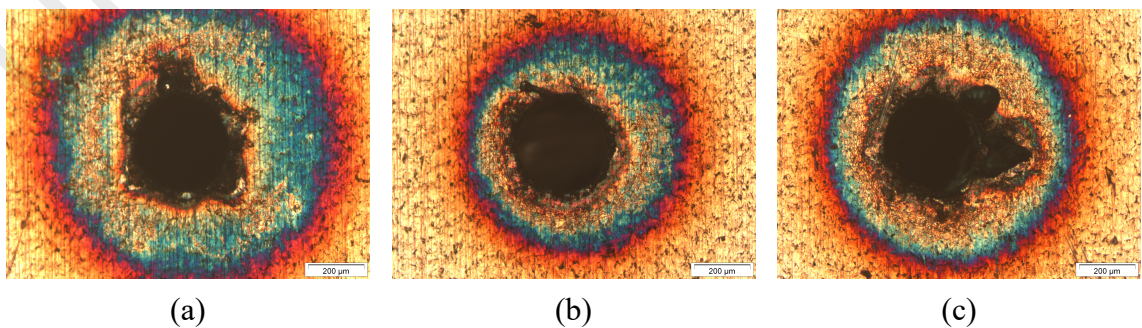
Holes bottom surfaces of 500 μm SS304 sheet
